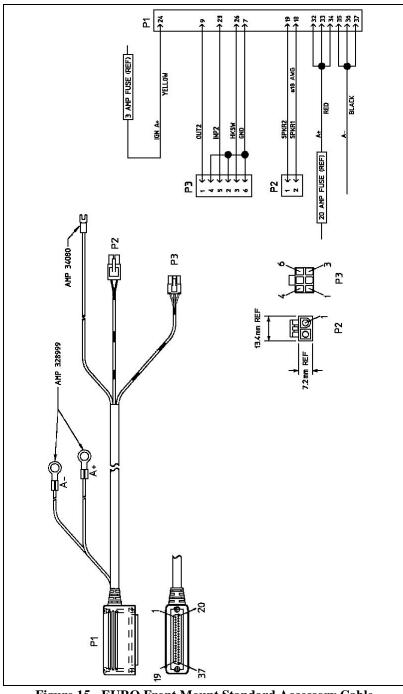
EURO Front Mount Standard Accessory Cable 19B802554P11
